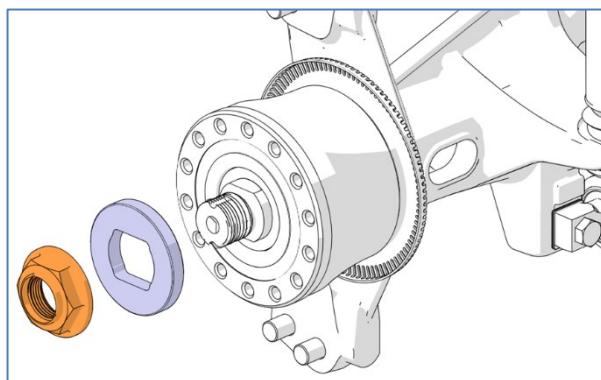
INSTALL THRUST WASHER AND HUB NUT
